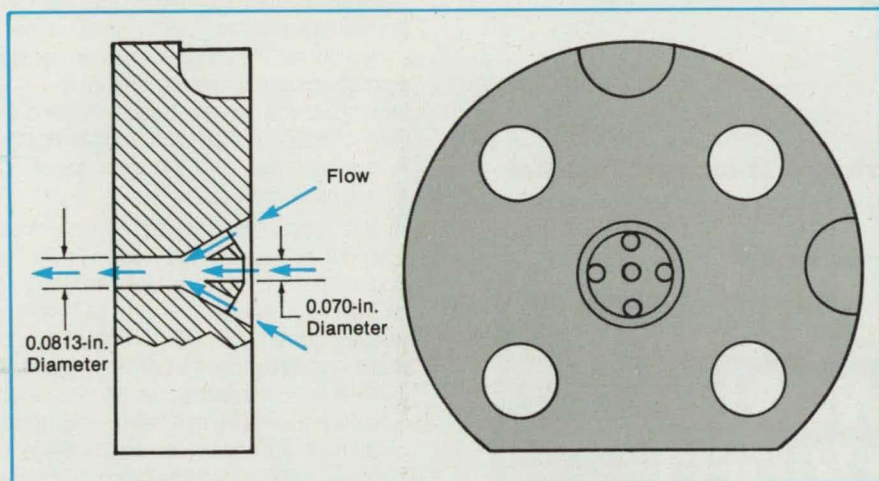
The Multiple-Inlet/Single-Outlet Orifice is machined in a plate in place of a single perpendicular hole of 0.0813-in. (2.07-mm) diameter.
